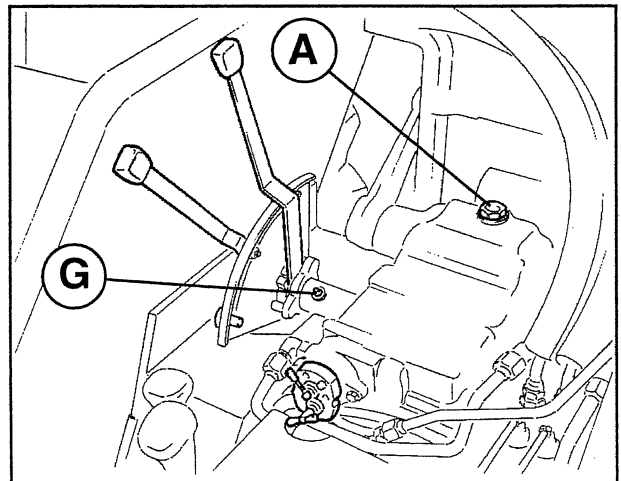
Gearbox oil filler cap and lift control lever greaser.
